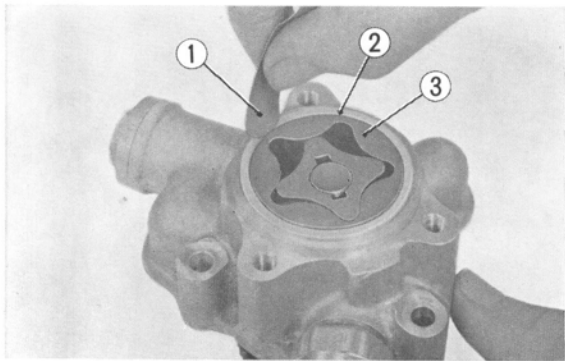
① Feeler gauge ② Pump body ③ Outer rotor
